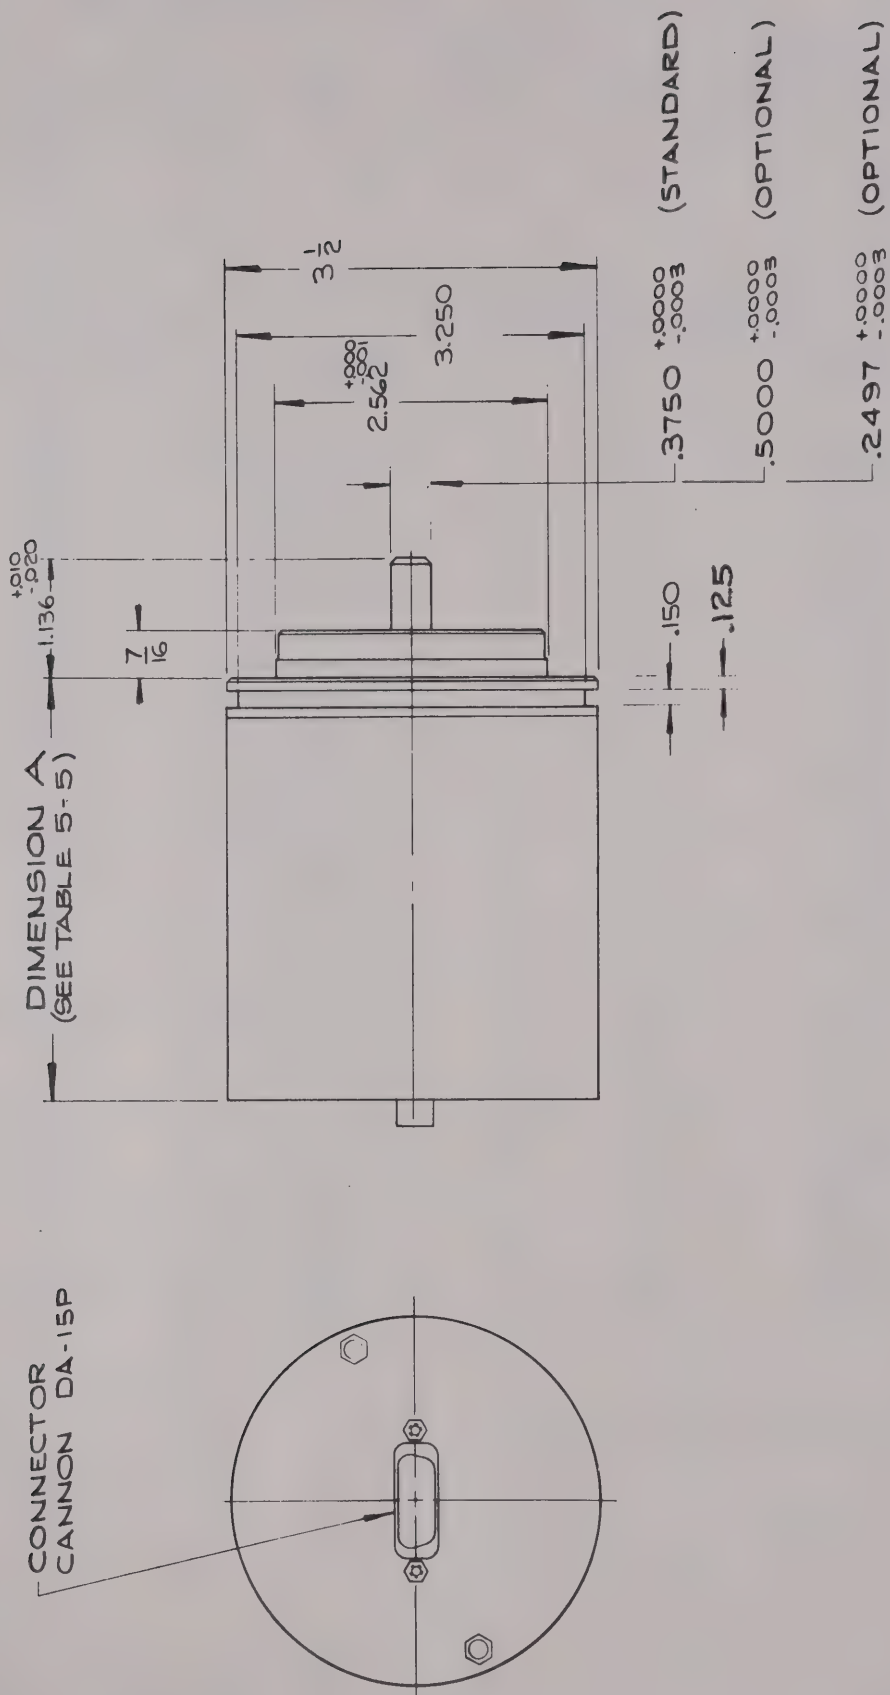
Outline dimensions of standard DIGISEC RI /35C series encoders
